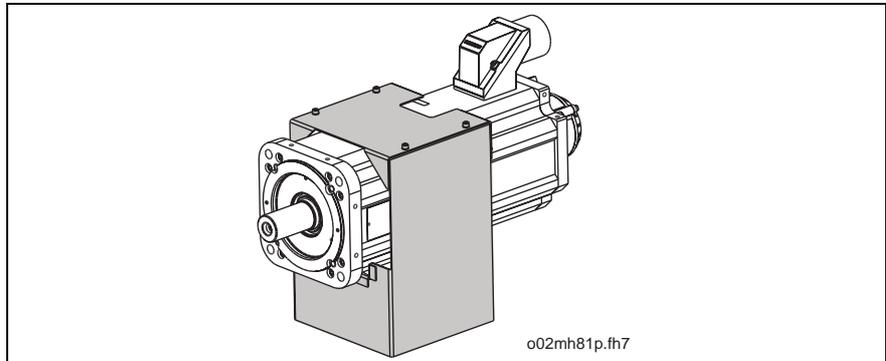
Examples of an MHP motor with radial surface cooling
